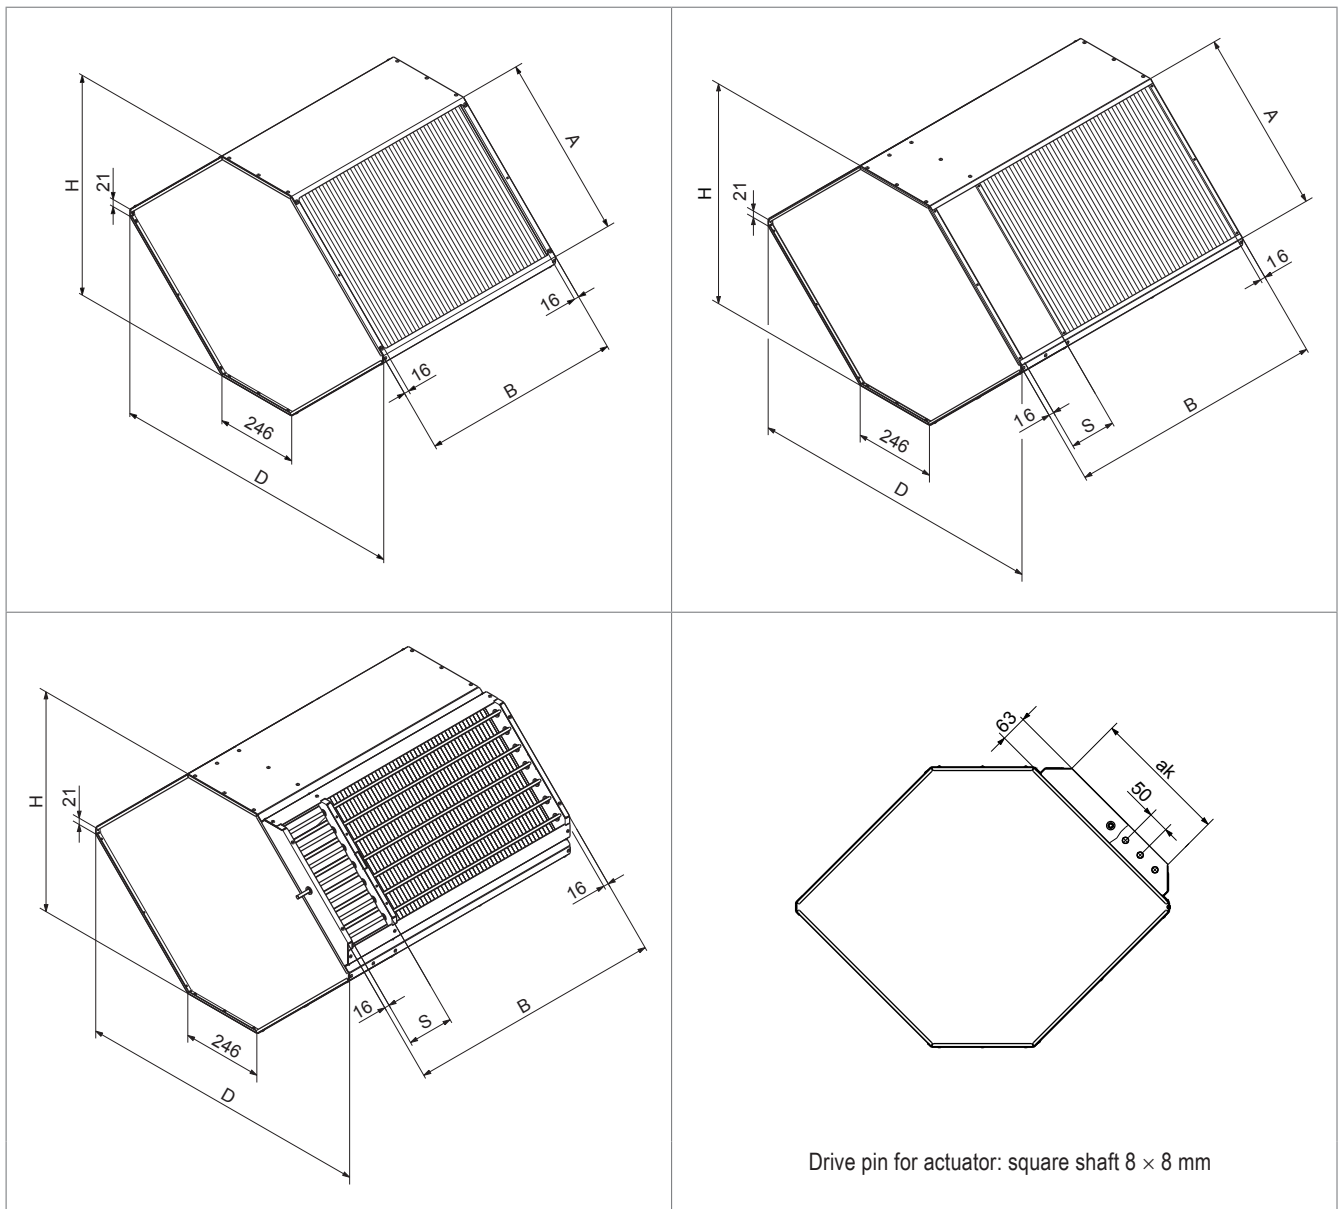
Dimension sheet for Gotthard plate heat exchanger (dimensions in mm)
